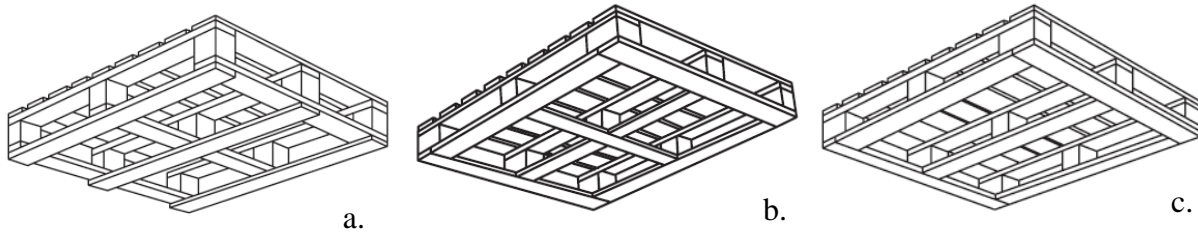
Examples of bottom deck construction pallets: a) overlap, b) cruciform, and c) perimeter base pallet (*ISO 445:2008*)
